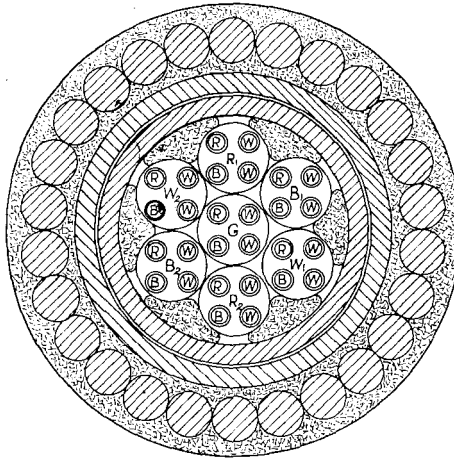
CROSS SECTION OF CABLE, FULL SIZE.
